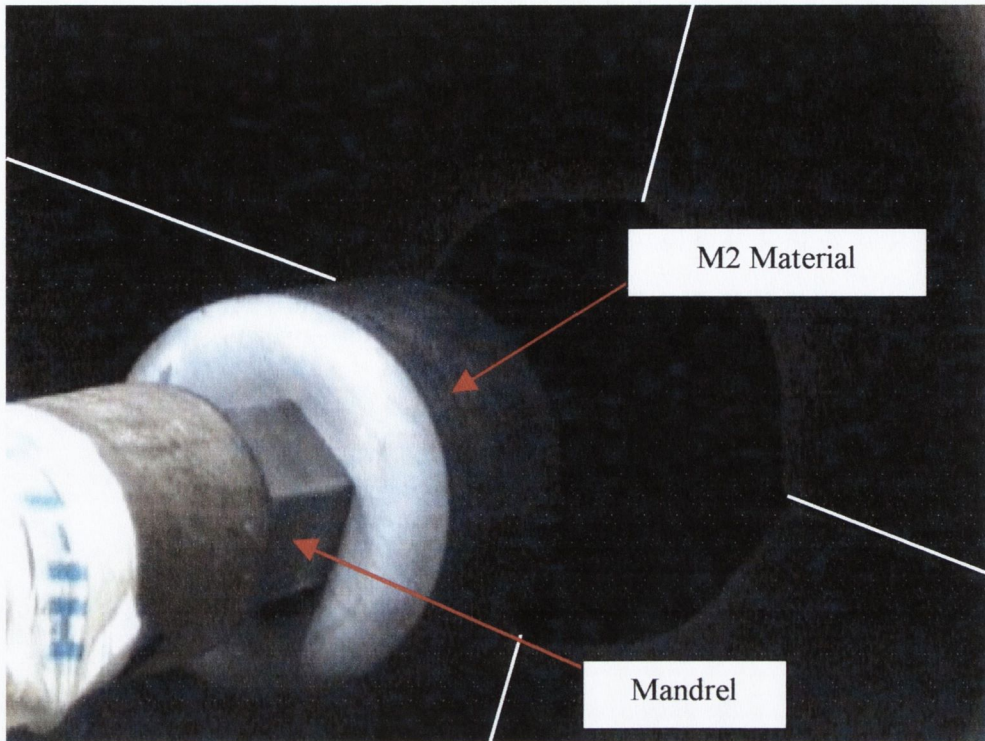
Heated Tubular M2 Stock on Tapered Hexagonal Mandrel
